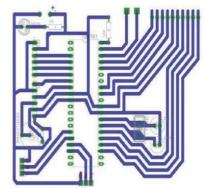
Fig.O. PCB Layout P.SOFTWARE DESIGN:
